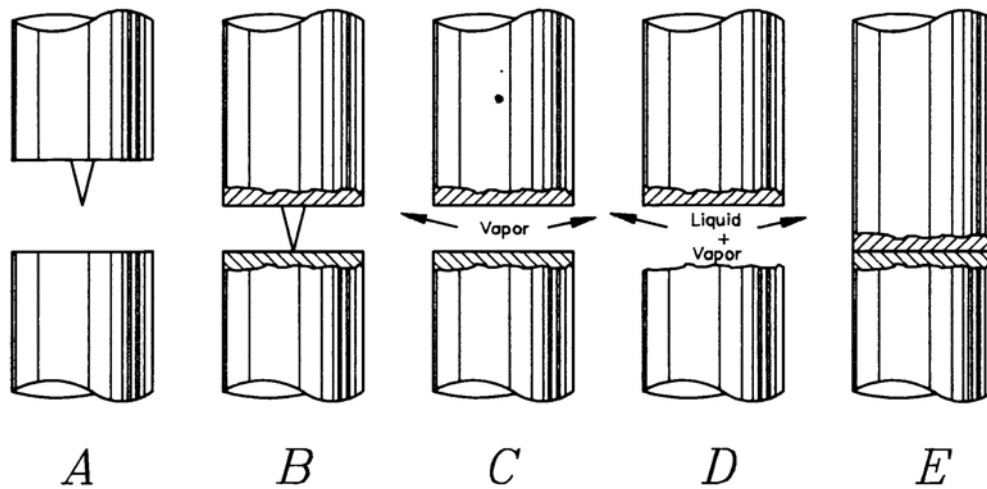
Schematic diagram of Capacitor Discharge Welding process. A. cathode positioned above anode; B. arc ignition at the welding top; C. plasma expulsion; D. ejection and condensation of plasma into small metal particles; E. Joint after electrode contact [33].
